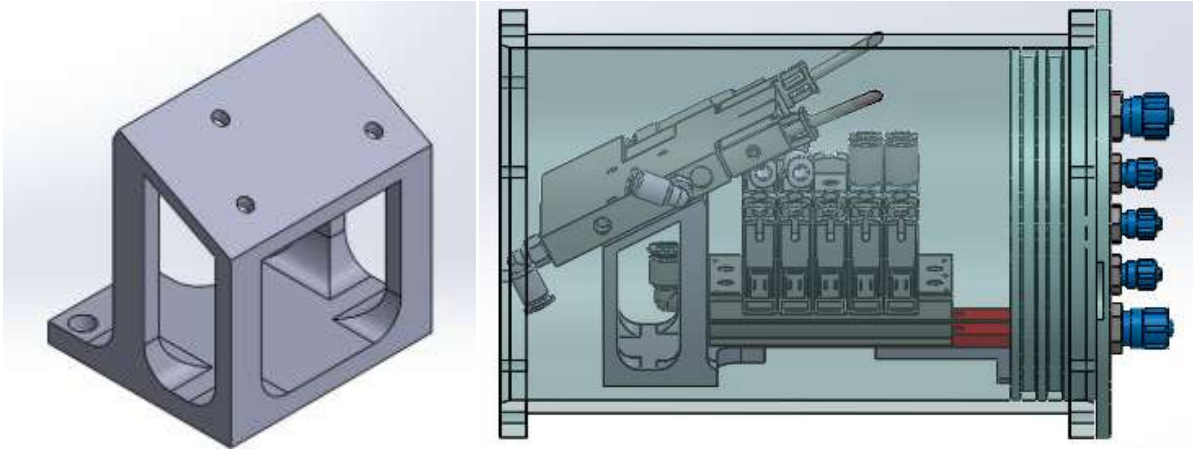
Left - Isometric CAD View of the Vacuum Generator Mount, Right - CAD Assembly of the Vacuum Generator inside the Pneumatic Hull
